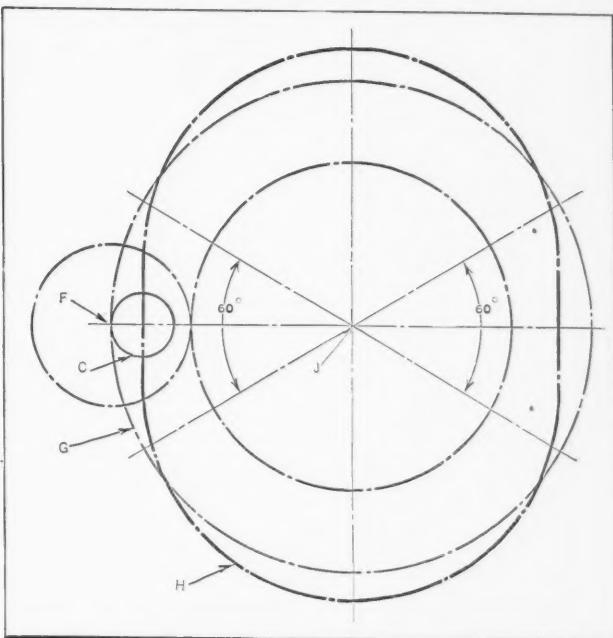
Diagram Showing how Eccentric Rotation of Crankpin Causes Dwell at Ends of Stroke
